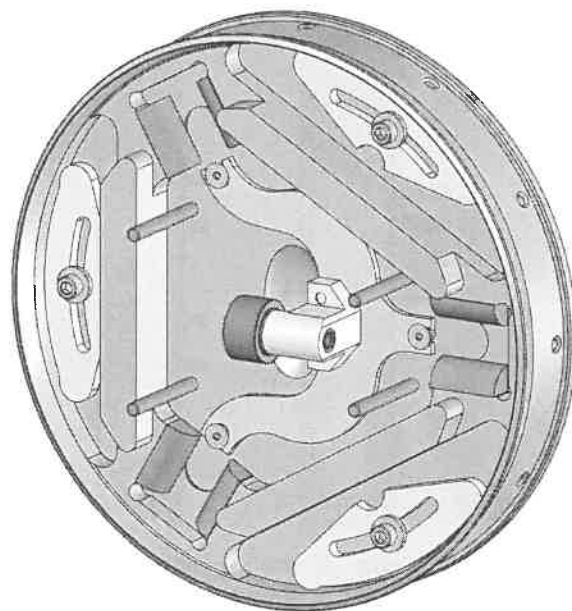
Inner workings of the universal interface include a Y-shaped preload spring, three vees formed by six quarter cylinders, and three adjustable counterweights for single-plane balancing.
